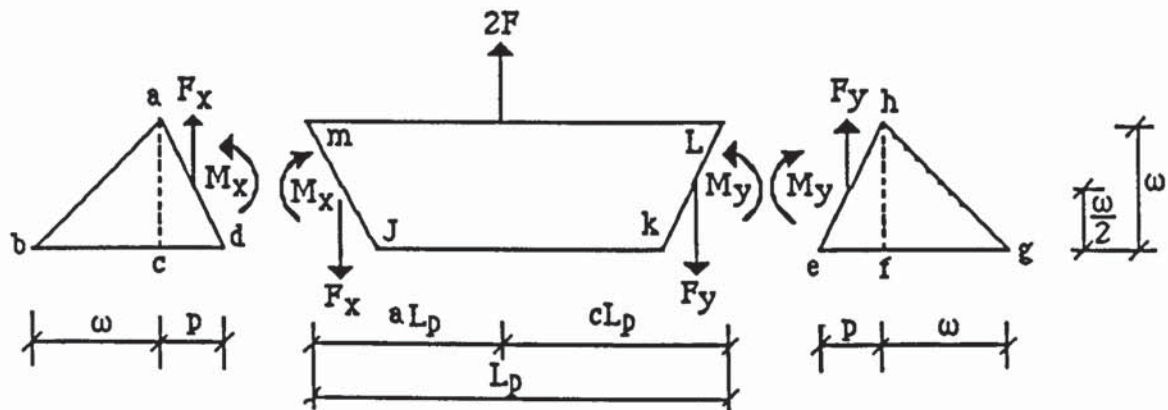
Forces on fillet welds in the temporary end plate welded connection.
